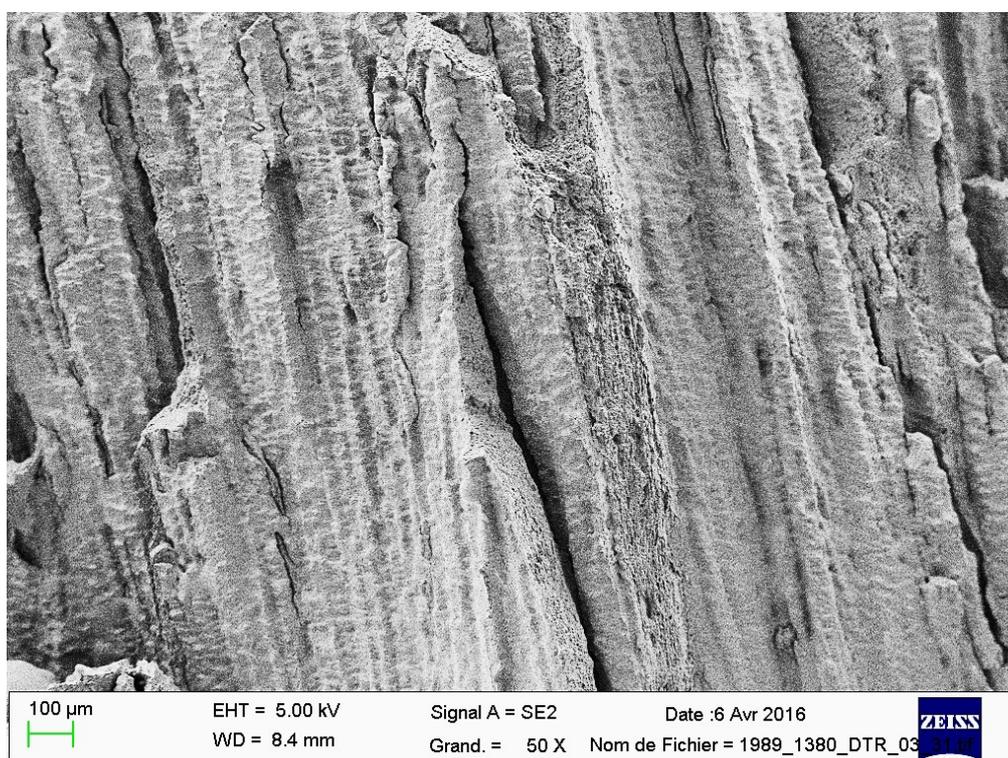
Gleeble test fracture surface on 52M alloy at 870°C on cooling
